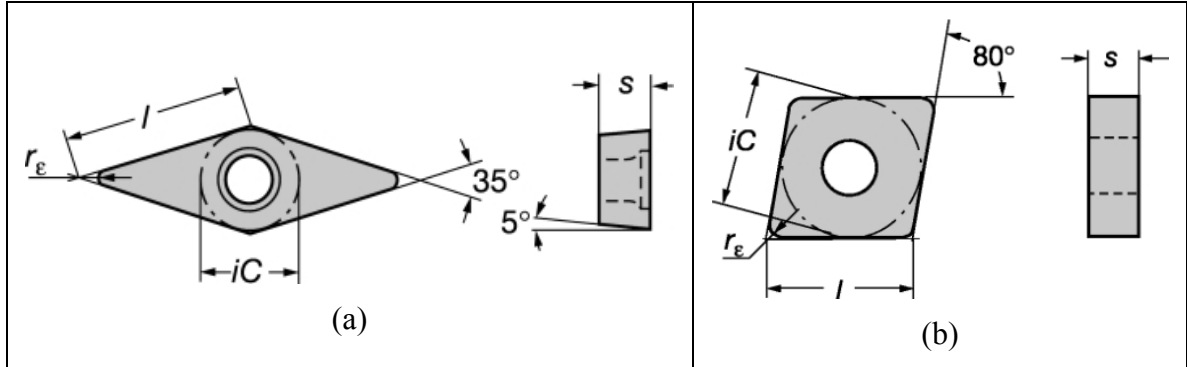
Cutting tool insert properties for (a) honed and (b) chamfered tools
